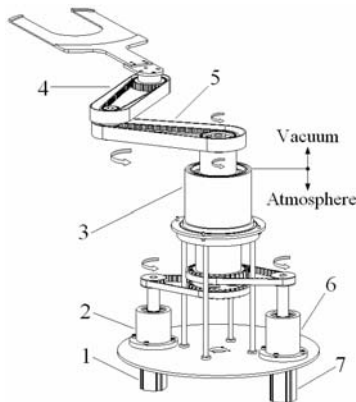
Descriptive diagram for θ movement of wafer-handling robot: 1- AC servomotor of inner shaft; 2- Harmonic reducer of inner shaft; 3- Coaxial twin-shaft magnetic fluid rotary seals; 4- Forearm; 5- Back arm; 6- Harmonic reducer of outer shaft; 7- AC servomotor of outer shaft
